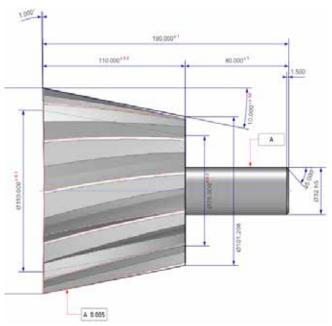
Dimensioning the shaft geometry of a conical cutter
